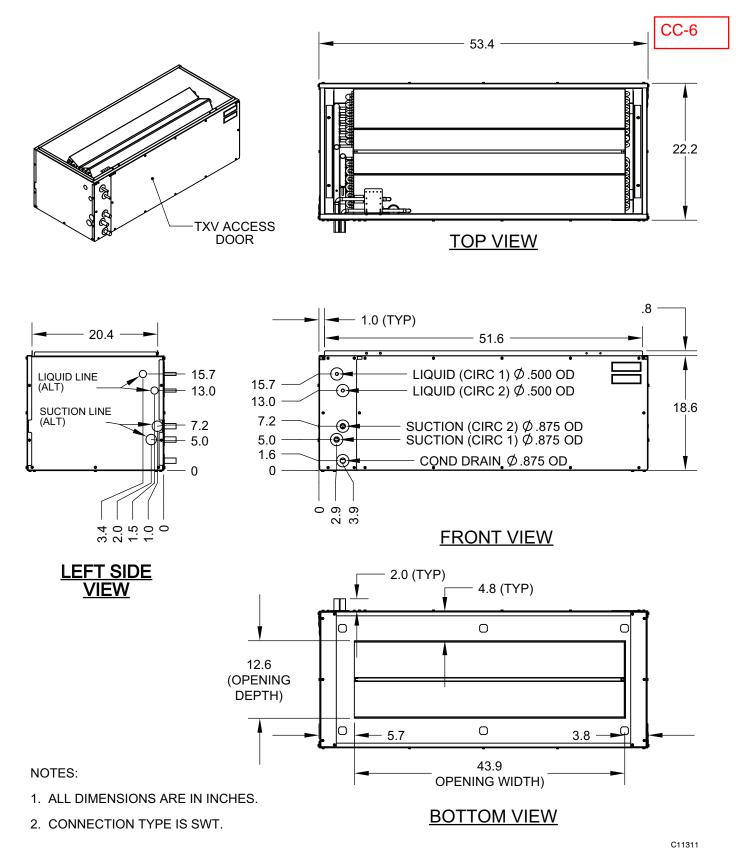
CAVTCOIL*12 Unit Dimensions
